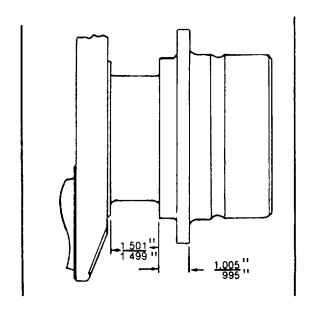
Measuring Crankshaft Thrust Surfaces.
